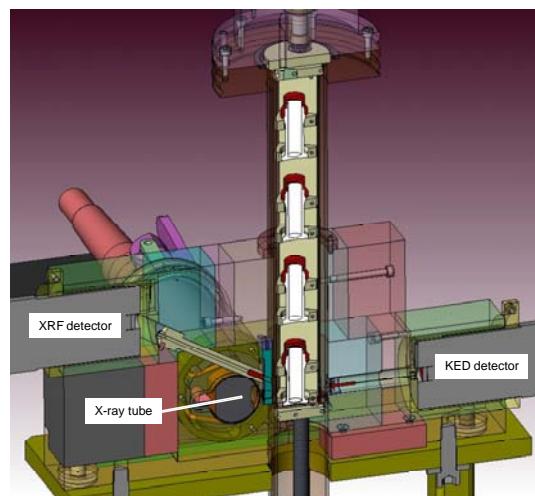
Vertical cross section of the HKED assembly on top of the hot cell.
